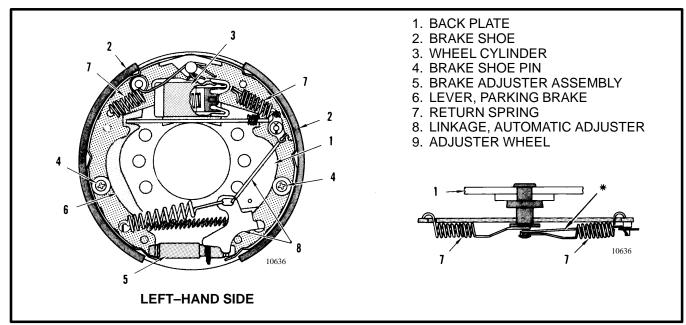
BRAKE ASSEMBLY, E/J1.25-1.75XL (E25-35XL)
